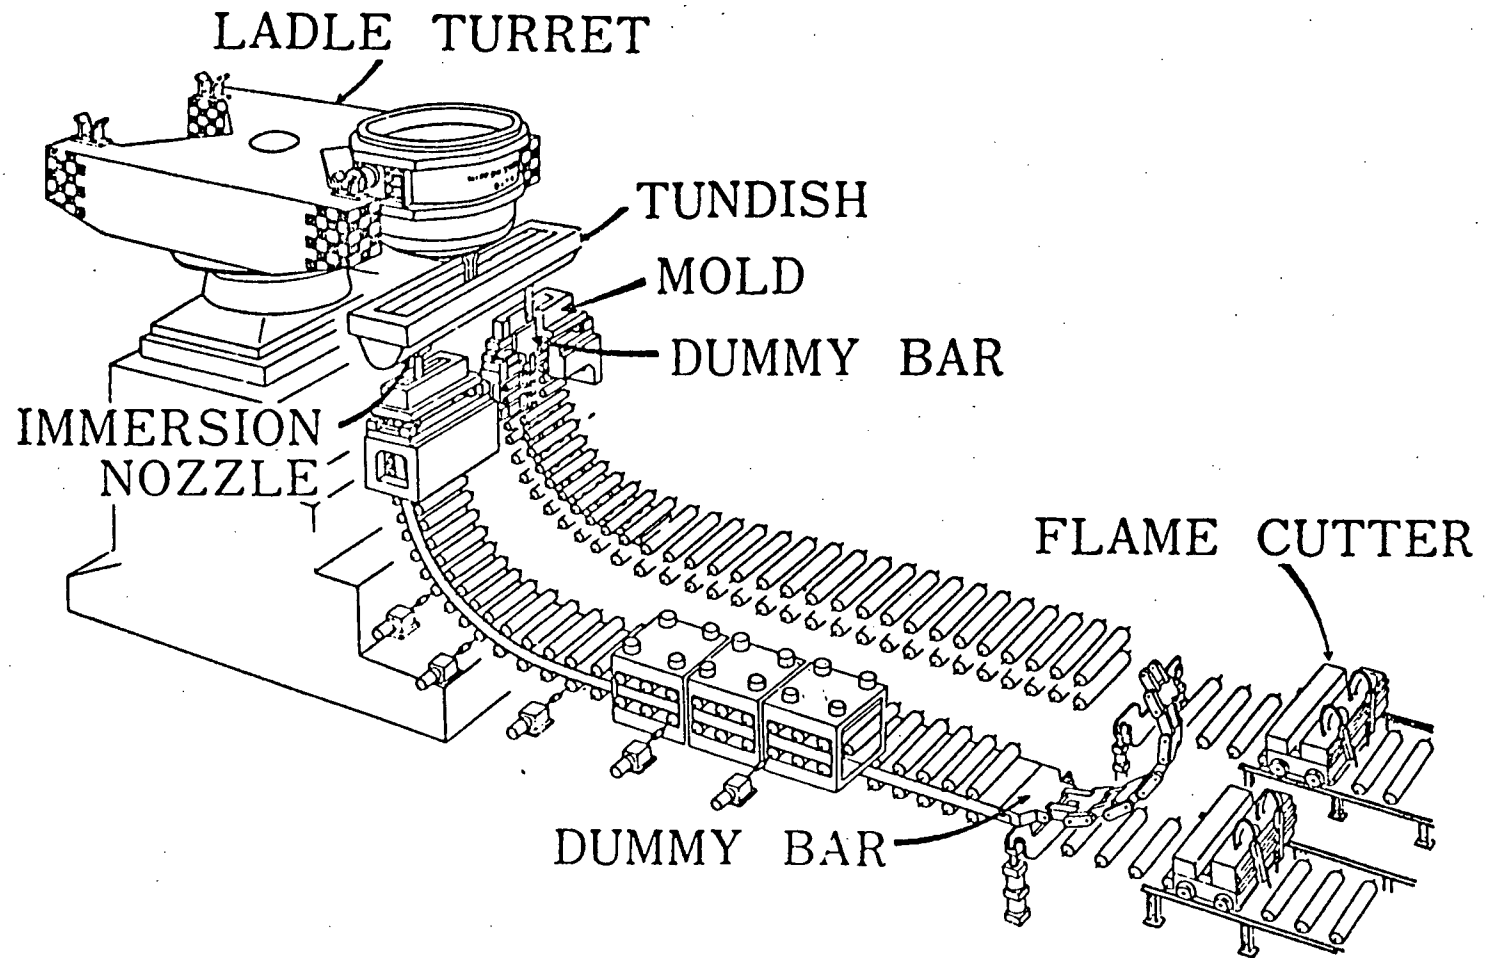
Schematic diagram of the main parts of a continuous slab casting machine.
